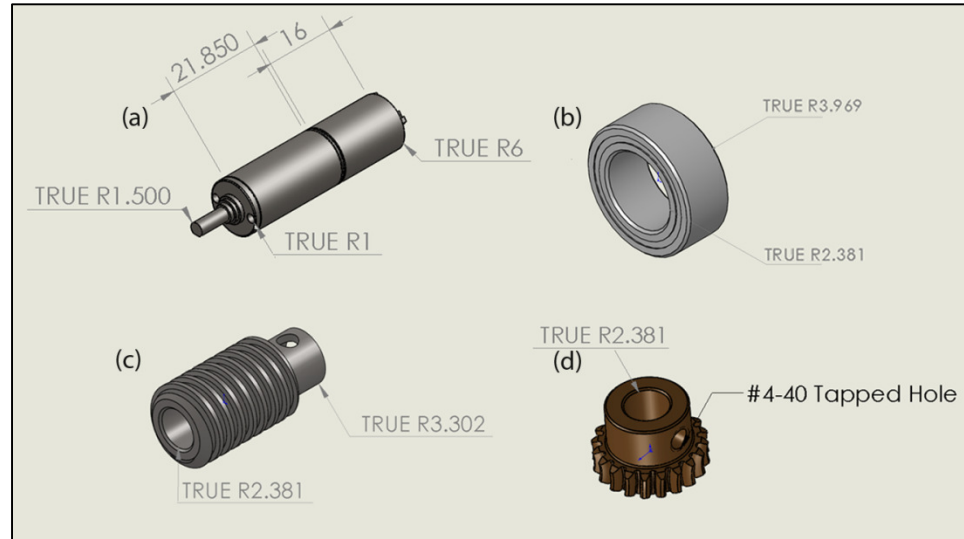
Selected parts that were purchased. Lengths in mm. (a) Micro-stepper motor from Faulhaber. (b) Bearing used with cams and worm-drive “coupler”. (c) Worm driven by motor that drives (d) worm gear that drives cam.
